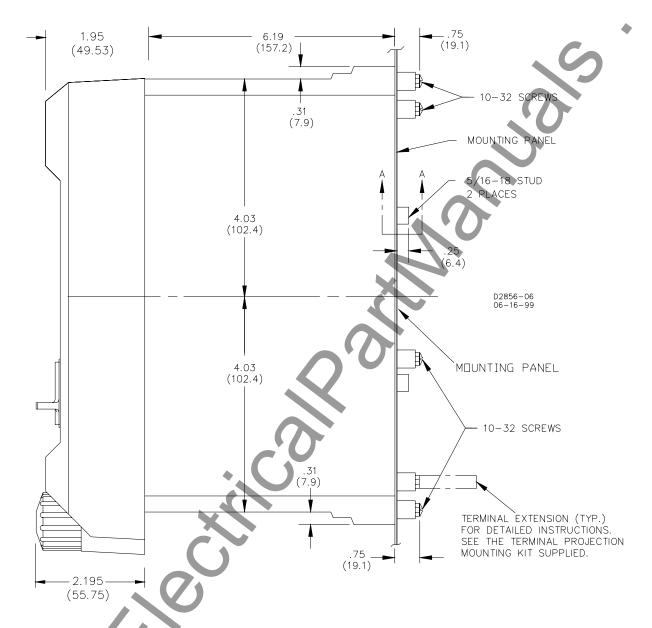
Case Dimensions, Side View, Double-Ended Projection-Mount Case
